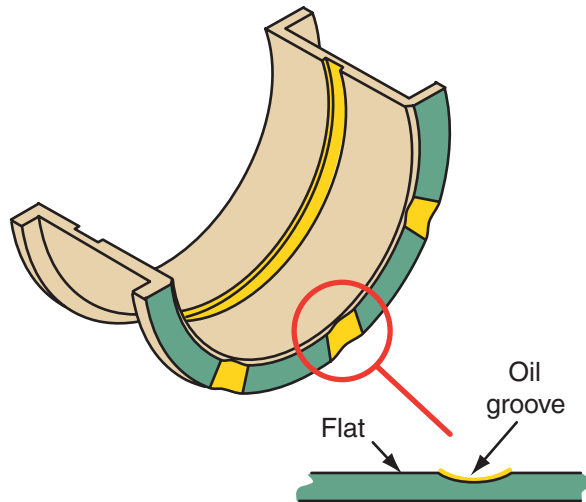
A thrust bearing with grooves cut into its flange to provide for better lubrication.
